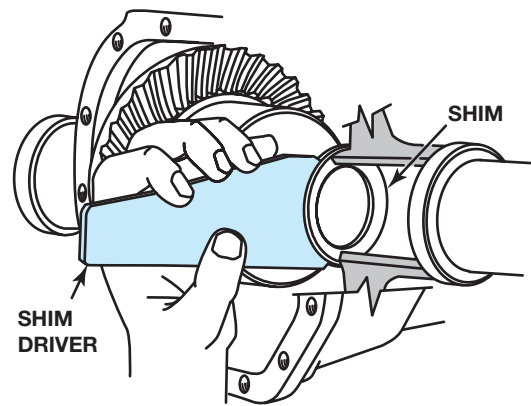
The last shim should be rather tight to install. It should be driven into place using either a soft hammer or special tool.
